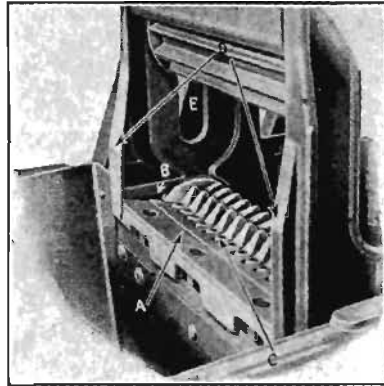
Shear plate A, and feed roll B, for flywheel silage cutter.
